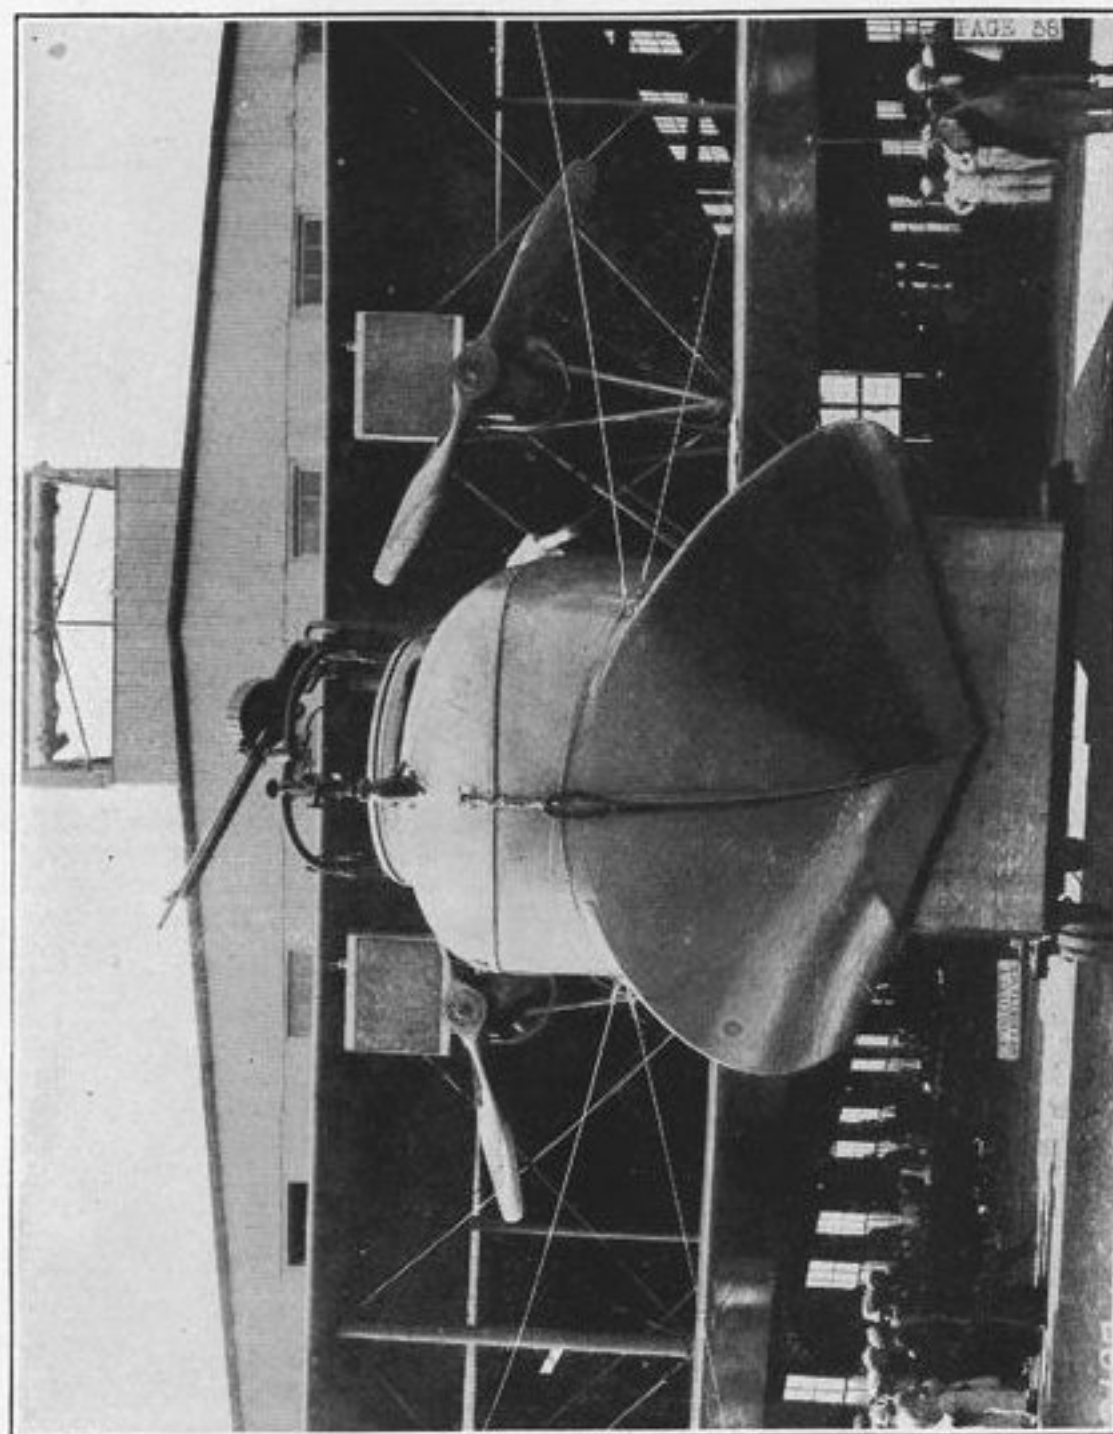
FRONT VIEW OF COMPLETE ASSEMBLY.
